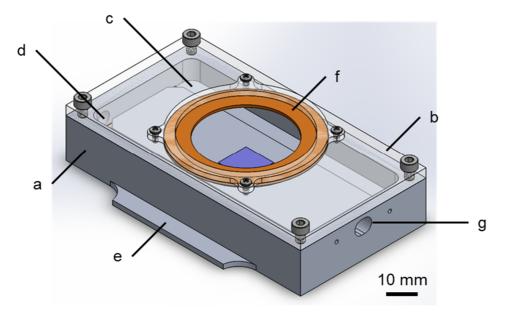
Annotated CAD model of the environmental control box used in this study, including the: (a) aluminum base; (b) acrylic lid; (c) heater stage; (d) gas inlet; (e) flanges to hold the box in place via magnets; (f) hole for the AFM head and rubber gasket to prevent leaks; and g) hole for the temperature and humidity sensor. Not shown here: the polyurethane foam insulation and porous diffuser underneath the heater plate and thermocouple locations.
